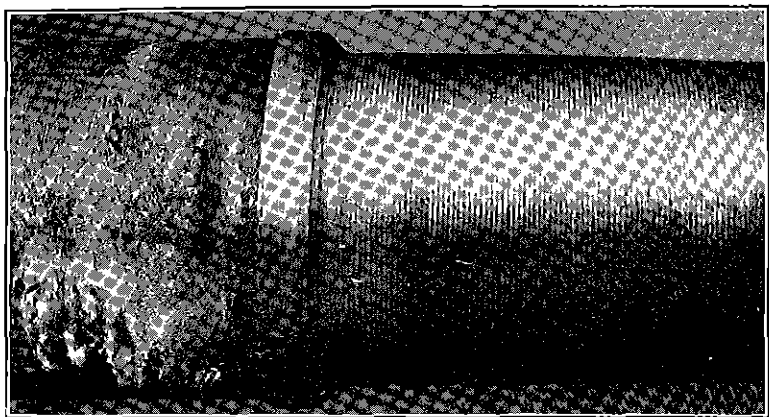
Appearance of a trailer axle which fractured at the shoulder at end opposite that here shown. Its failure attributed to a rough cut in the lathe used in turning the middle of the length of the axle together with the abrupt shoulder next wheel seat
